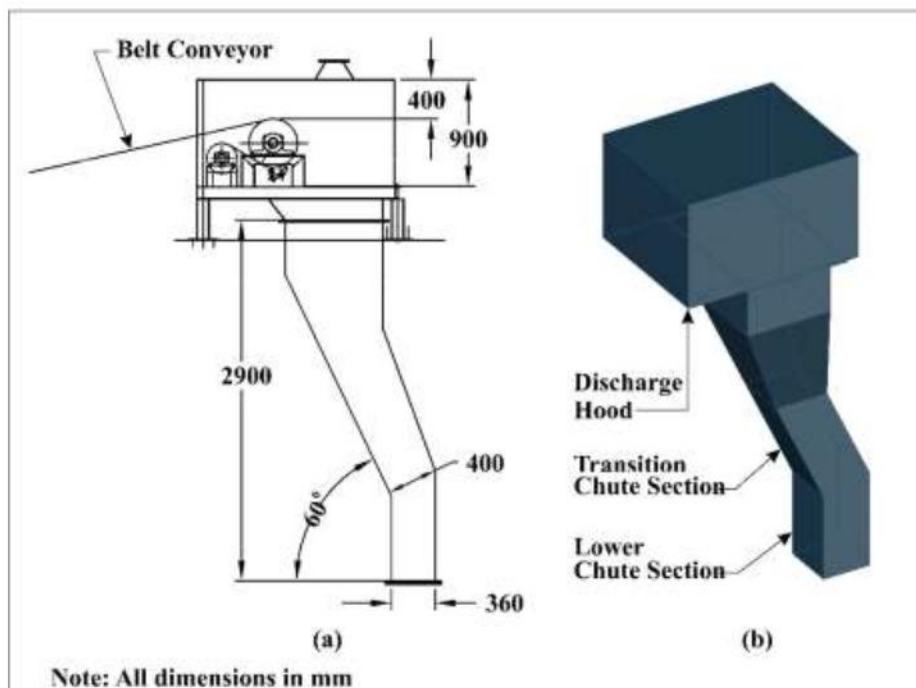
(a) 2D drawing and (b) CAD model of existing transfer chute
